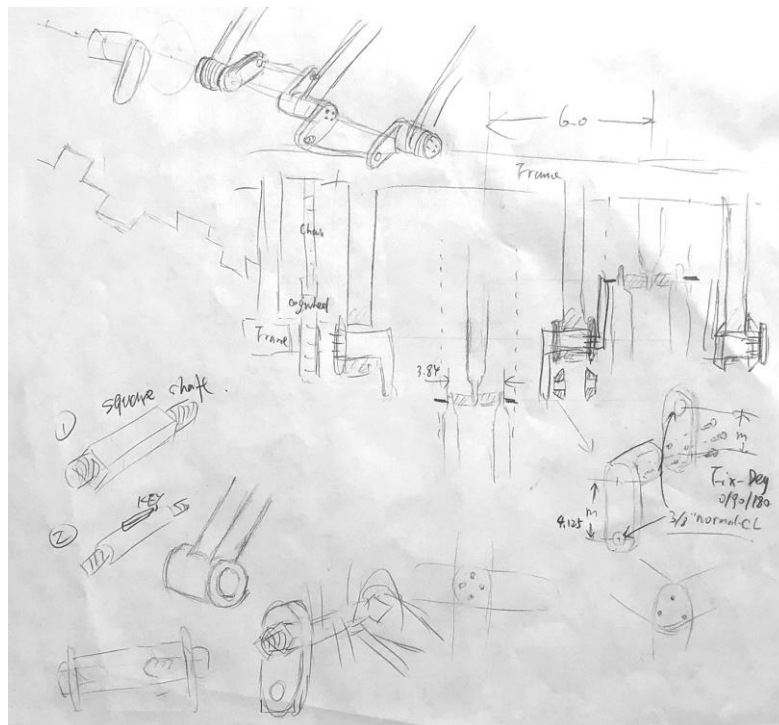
Manuscript for Rotating Crank prototype (Deprecated)
